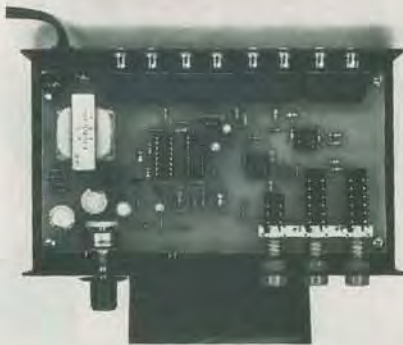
NOTE HOW LED is mounted *above* the board, not flush with it. All components including transformer and switches, are soldered to board.
